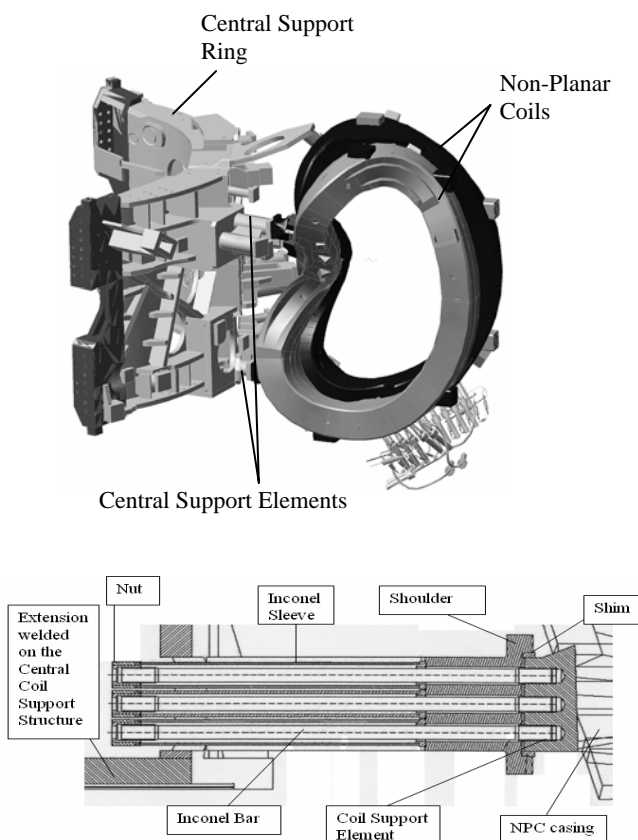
NPC connected to the CSR, cross-section of a central support element bolted connection.
